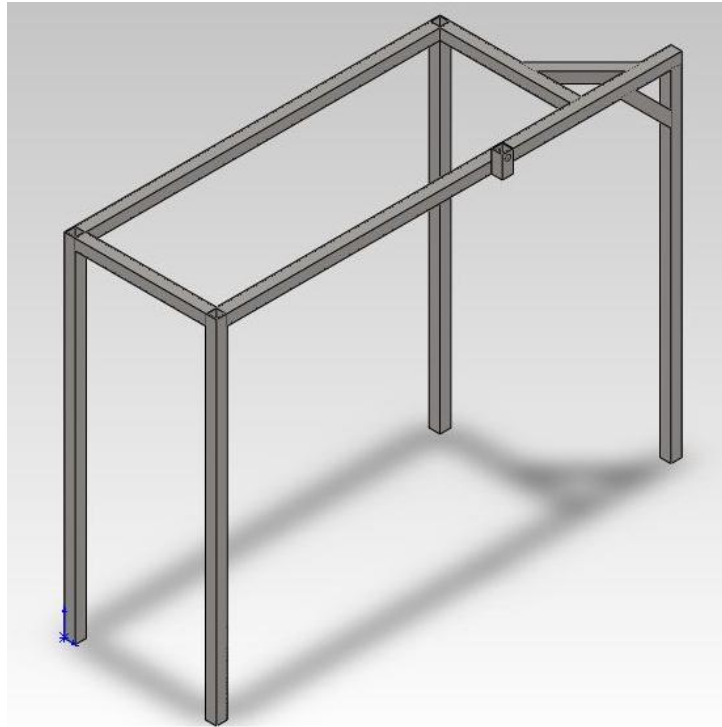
Upper frame for fatigue tester. The frame is made of $1\frac{1}{2}$ " x $1\frac{1}{2}$ " square carbon steel tubing. The upper frame supports the fourbar and weight assembly with slider.
